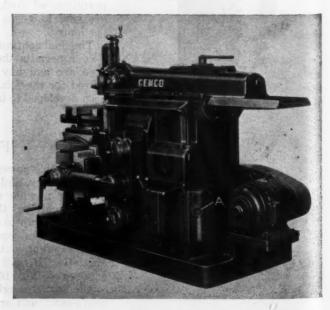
Gemco Shaper Equipped with "Lubrigard" Safety Device
